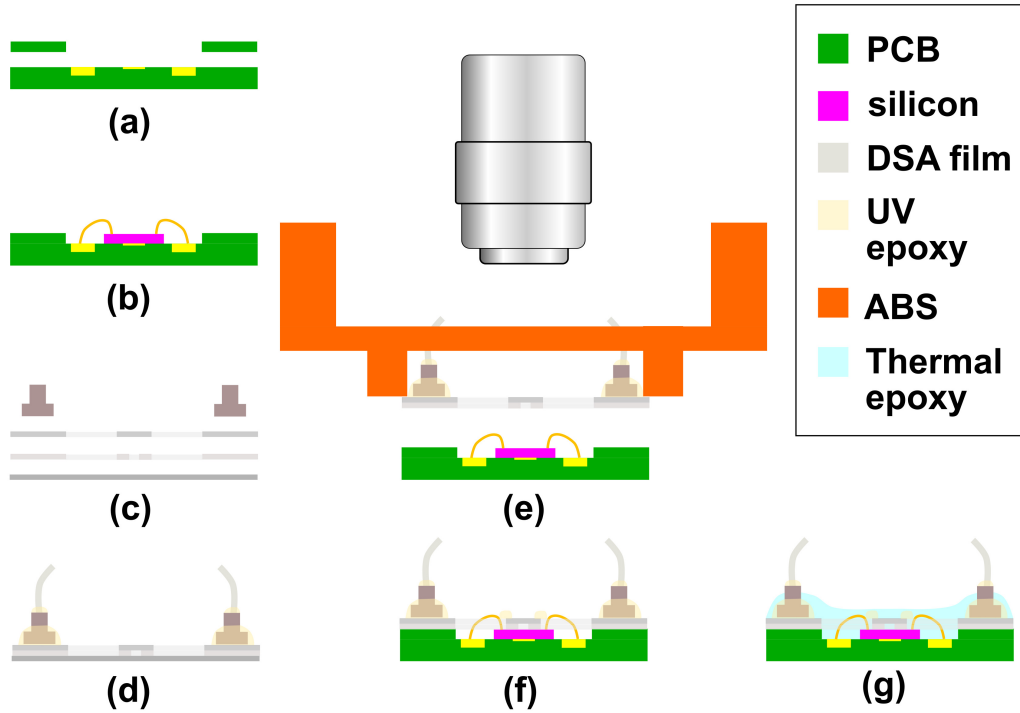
Process flow of integrating the xurographic microfluidic module with the sensor chip. (a) Top and bottom PCB boards were assembled together forming a chip carrier; (b) The prepared chip was attached and wire bonded to the carrier; (c) The xurographic model was separately cut and assembled. (d) Inlets and outlets were attached and tested; (e) Known-good xurographic model was assembled to the chip carrier with the assistant of a 3D printed fixture under the microscope; (f) The assembled cartridge went through a first UV epoxy sealing and a second (g) thermal epoxy potting process to improve their robustness.
